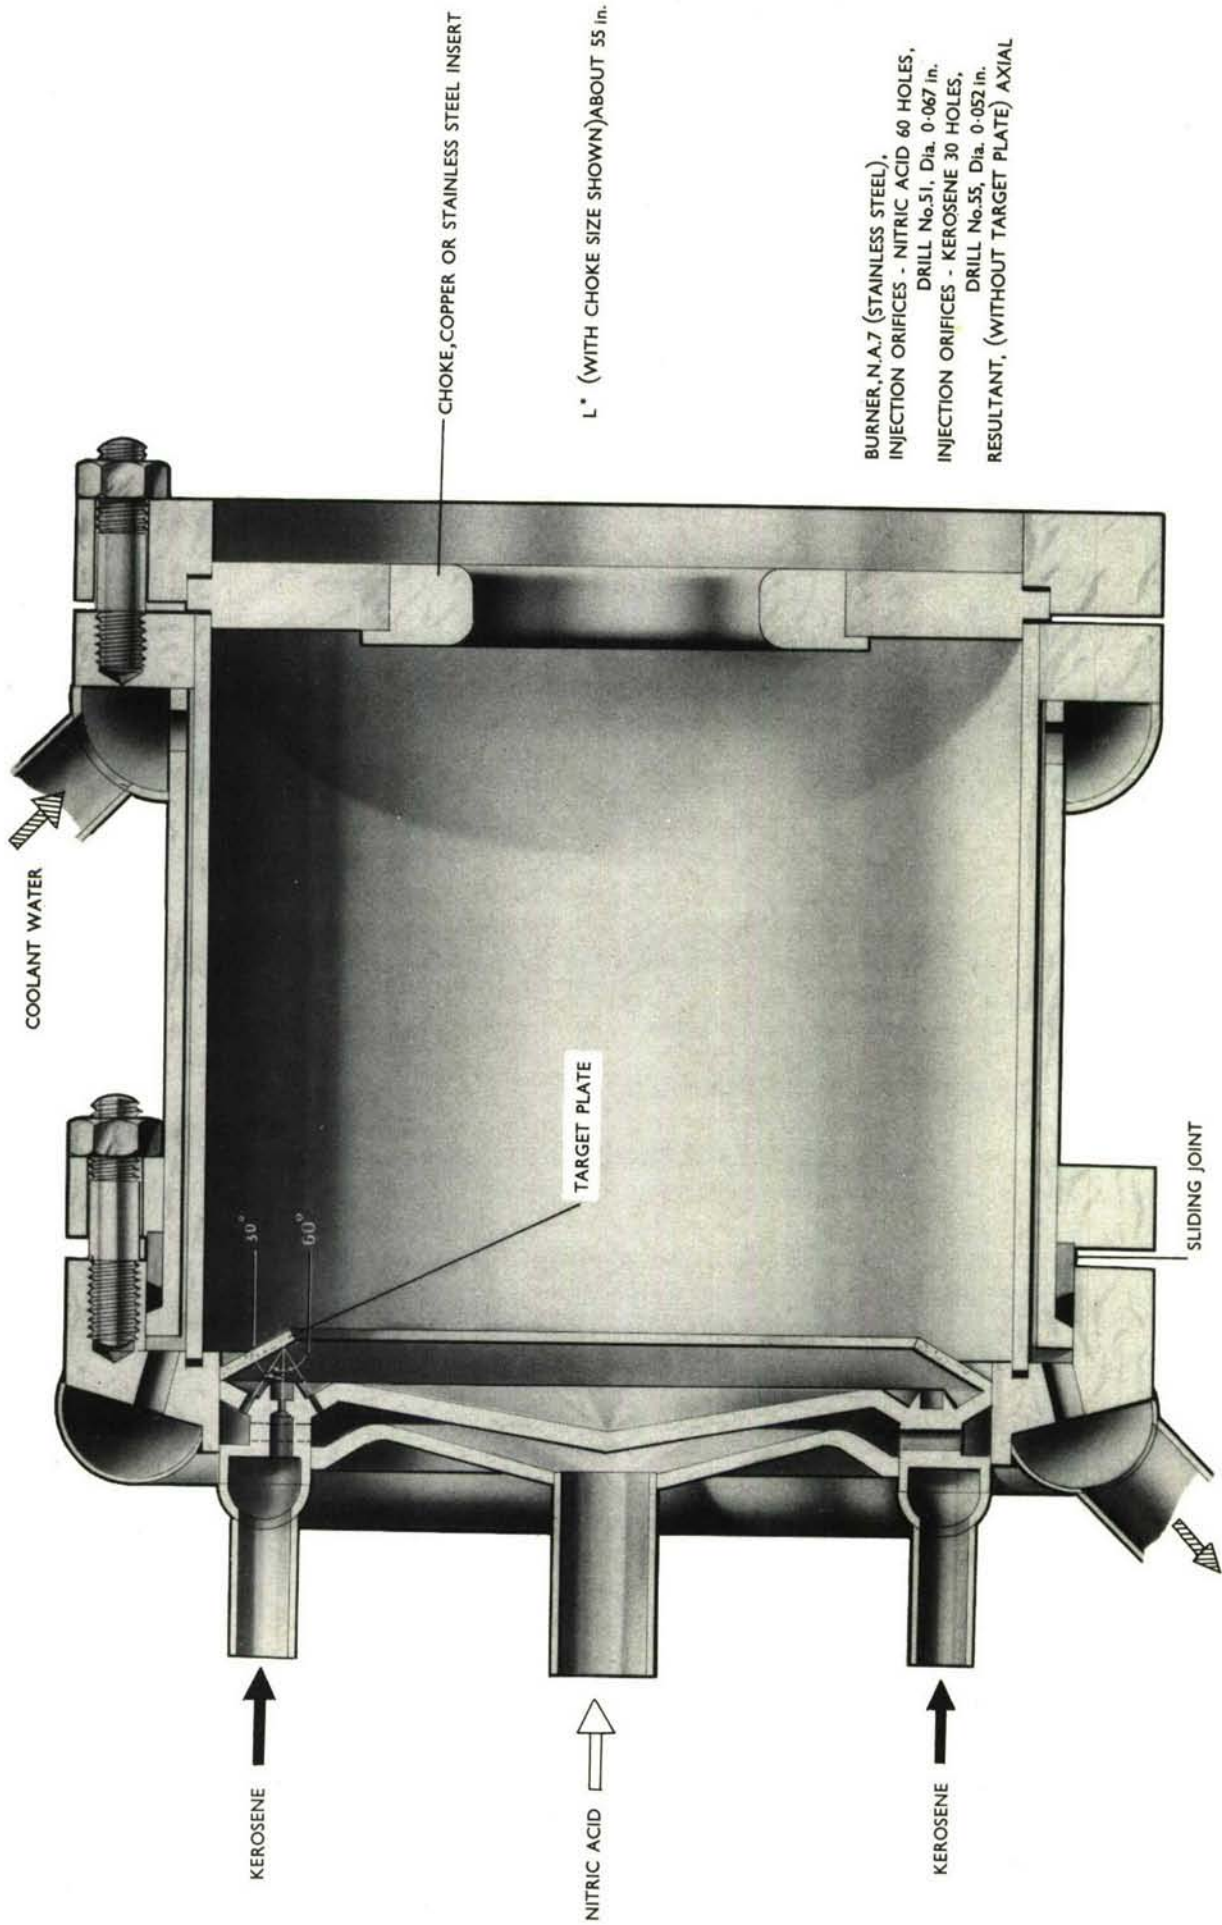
BURNER N.A.7 IN WATER COOLED TUBE CHAMBER (MILD STEEL)
